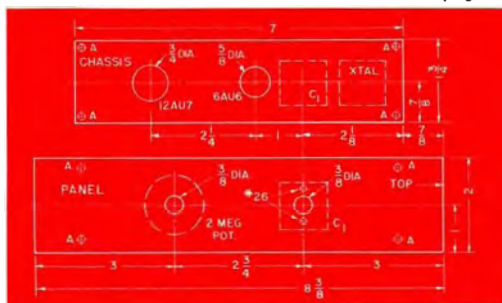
PANEL AND CHASSIS LAYOUT diagram for the CHANNEL SPOTTER. Holes marked "A" are No. 26 drill for corner posts on plate-and-post chassis. The crystal mounting will depend upon the type of holder.
